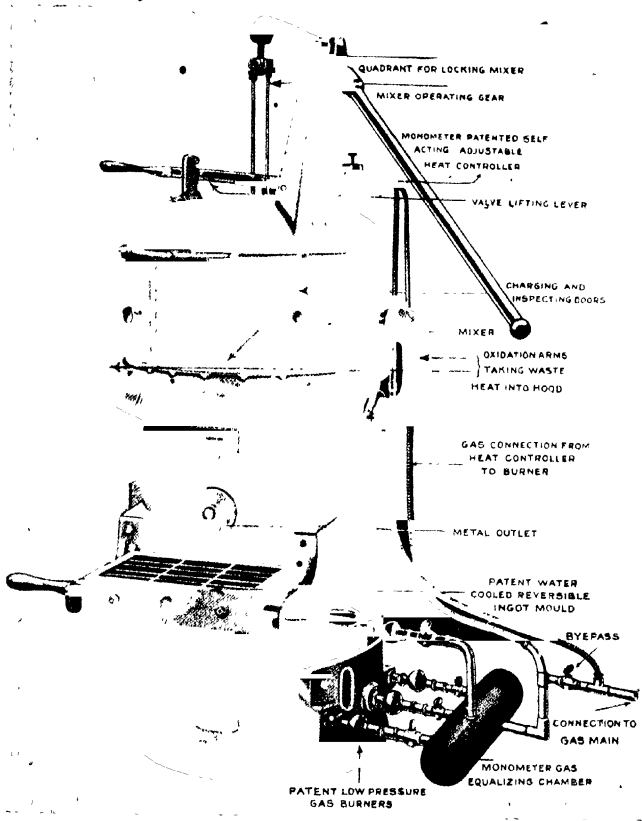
MONOMETER SOFT METAL MELTING FURNACE
